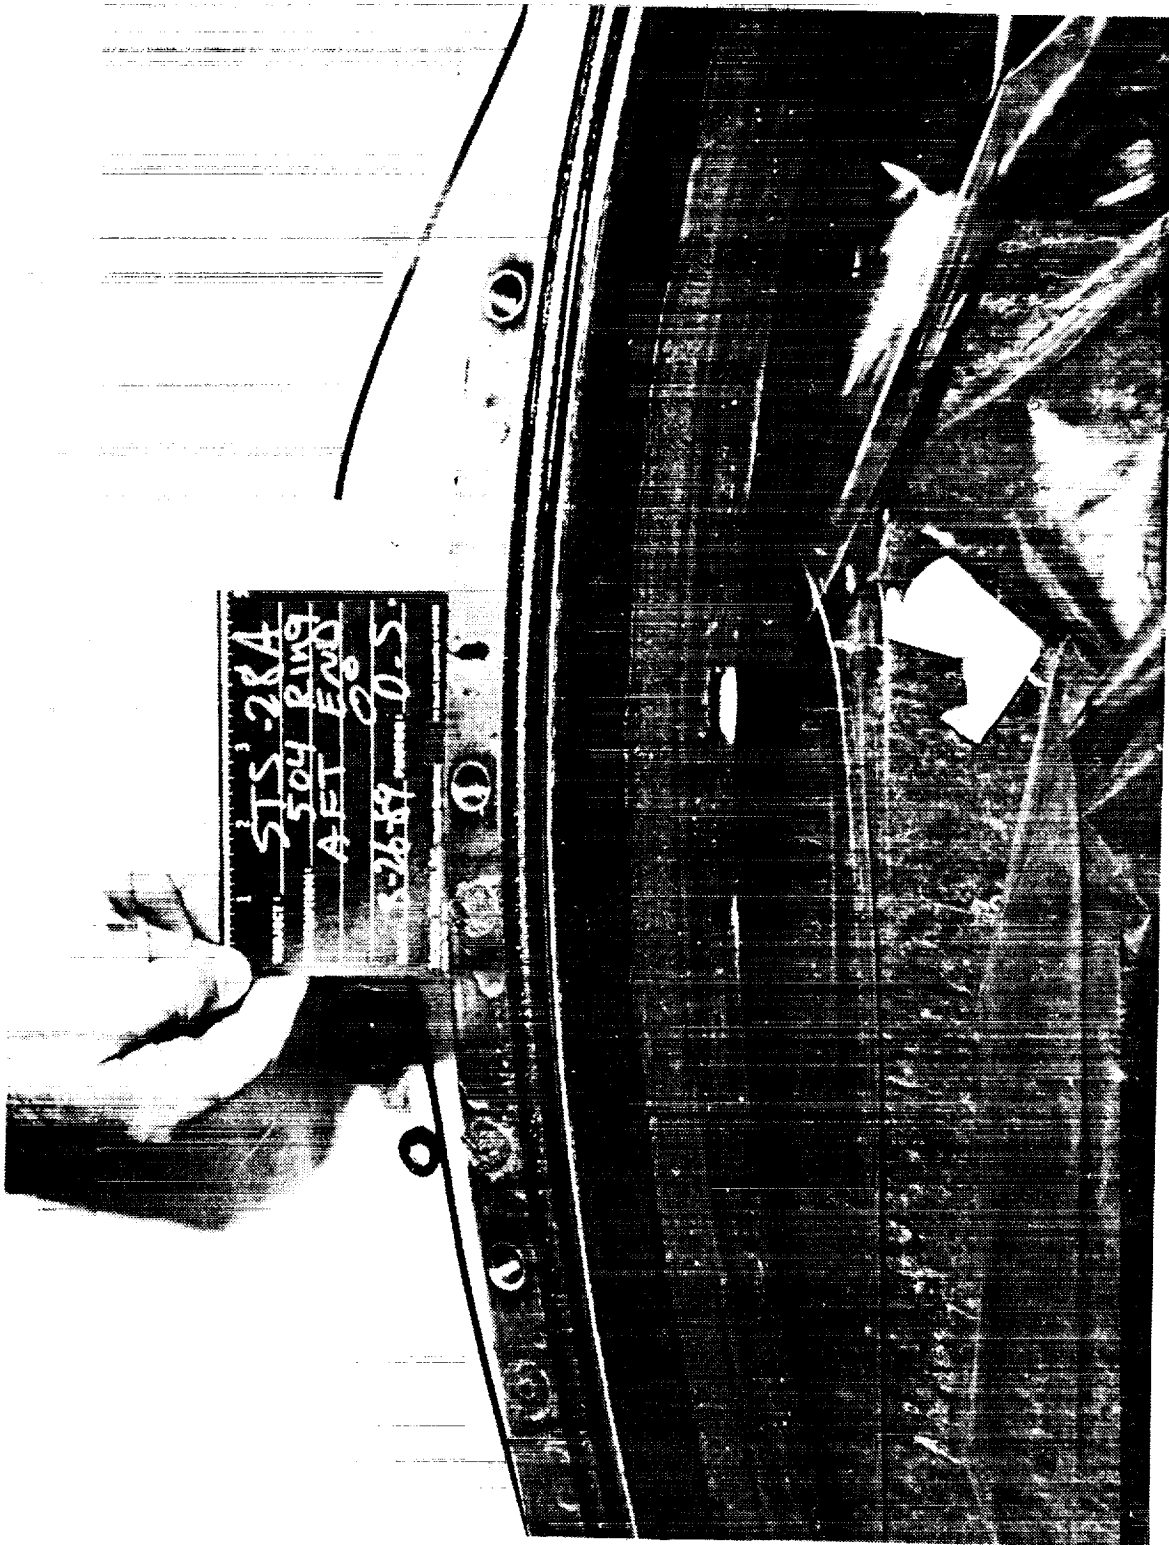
STS-28A Aft Inlet (-504) Ring - Aft End (0 deg)
